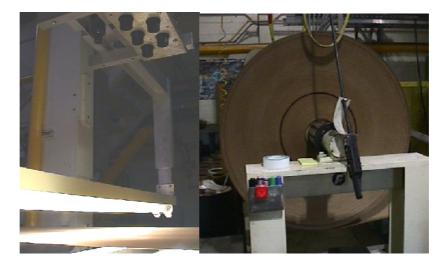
View of the inspection assembly and the linerboard defect marking during the linerboard export test
